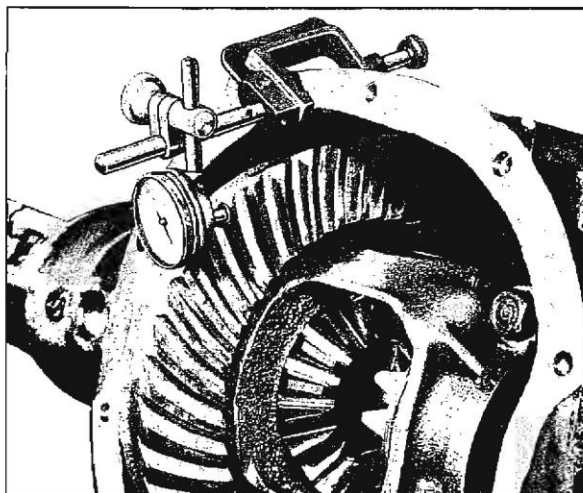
Checking Ring Gear to Pinion Backlash
